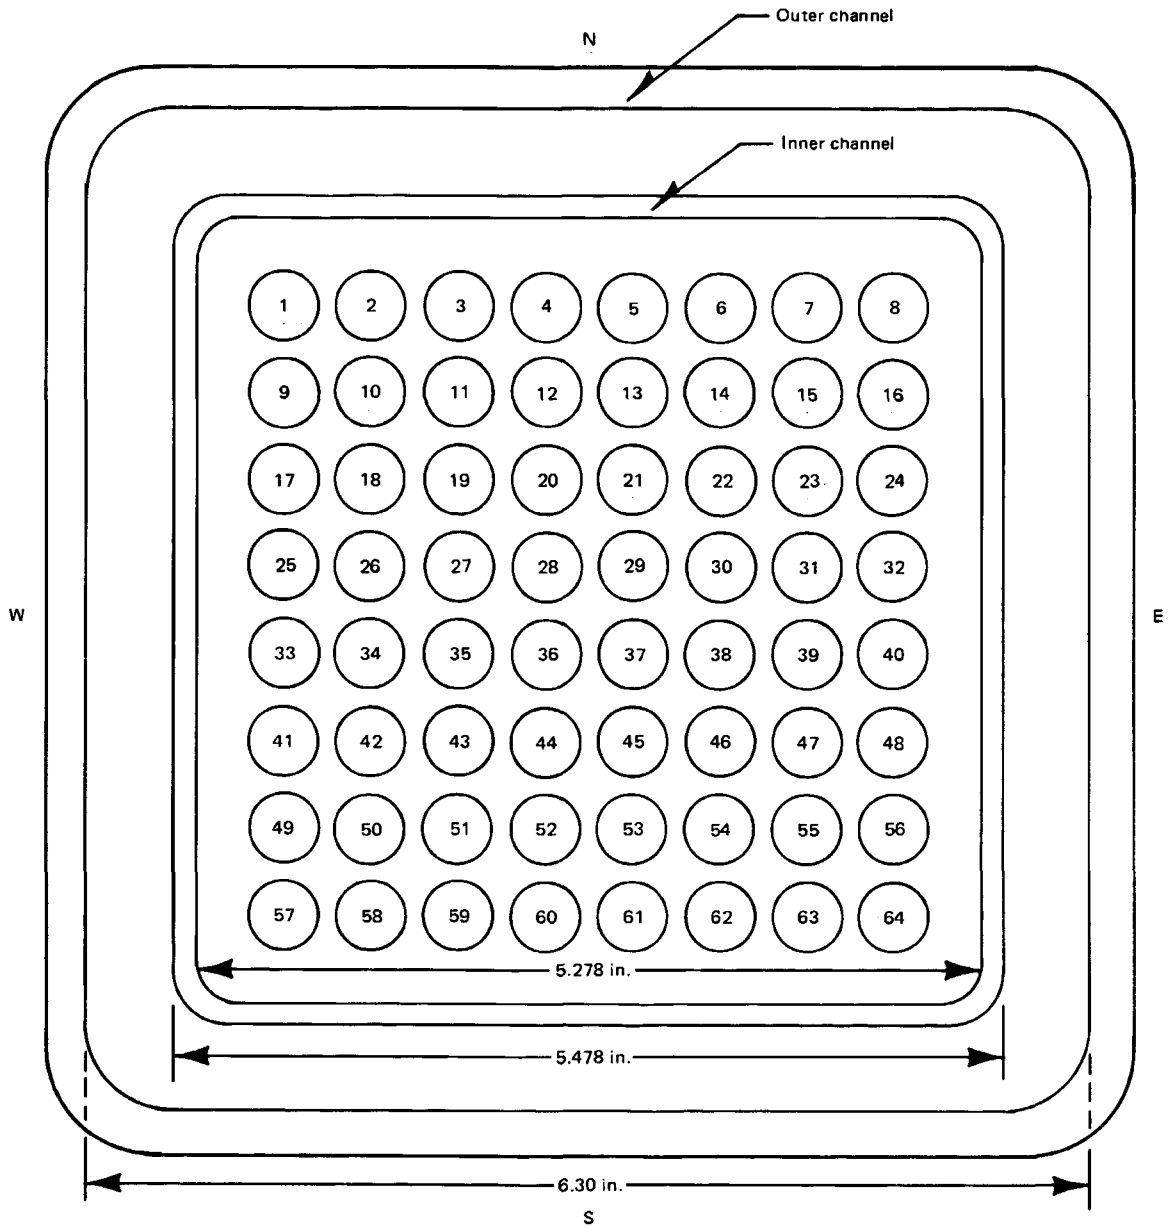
Bundle Cross Section Showing Rod Orientation
